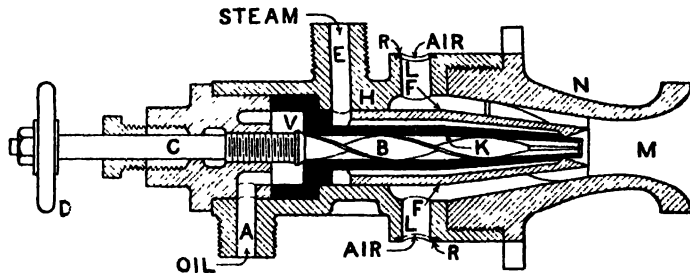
Kermode's steam-jet liquid fuel burner.
